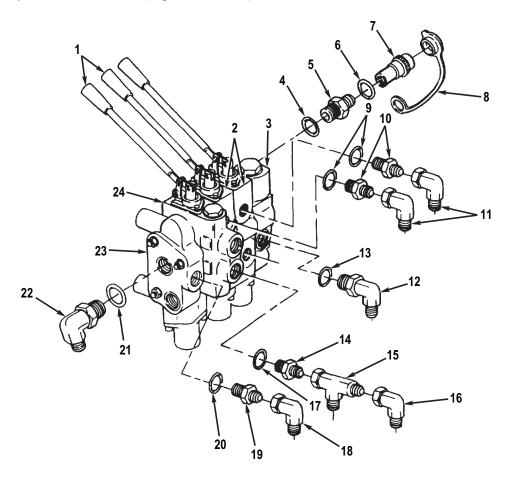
Hydraulic Control Valve (Rear Dolly) Fittings Removal.
